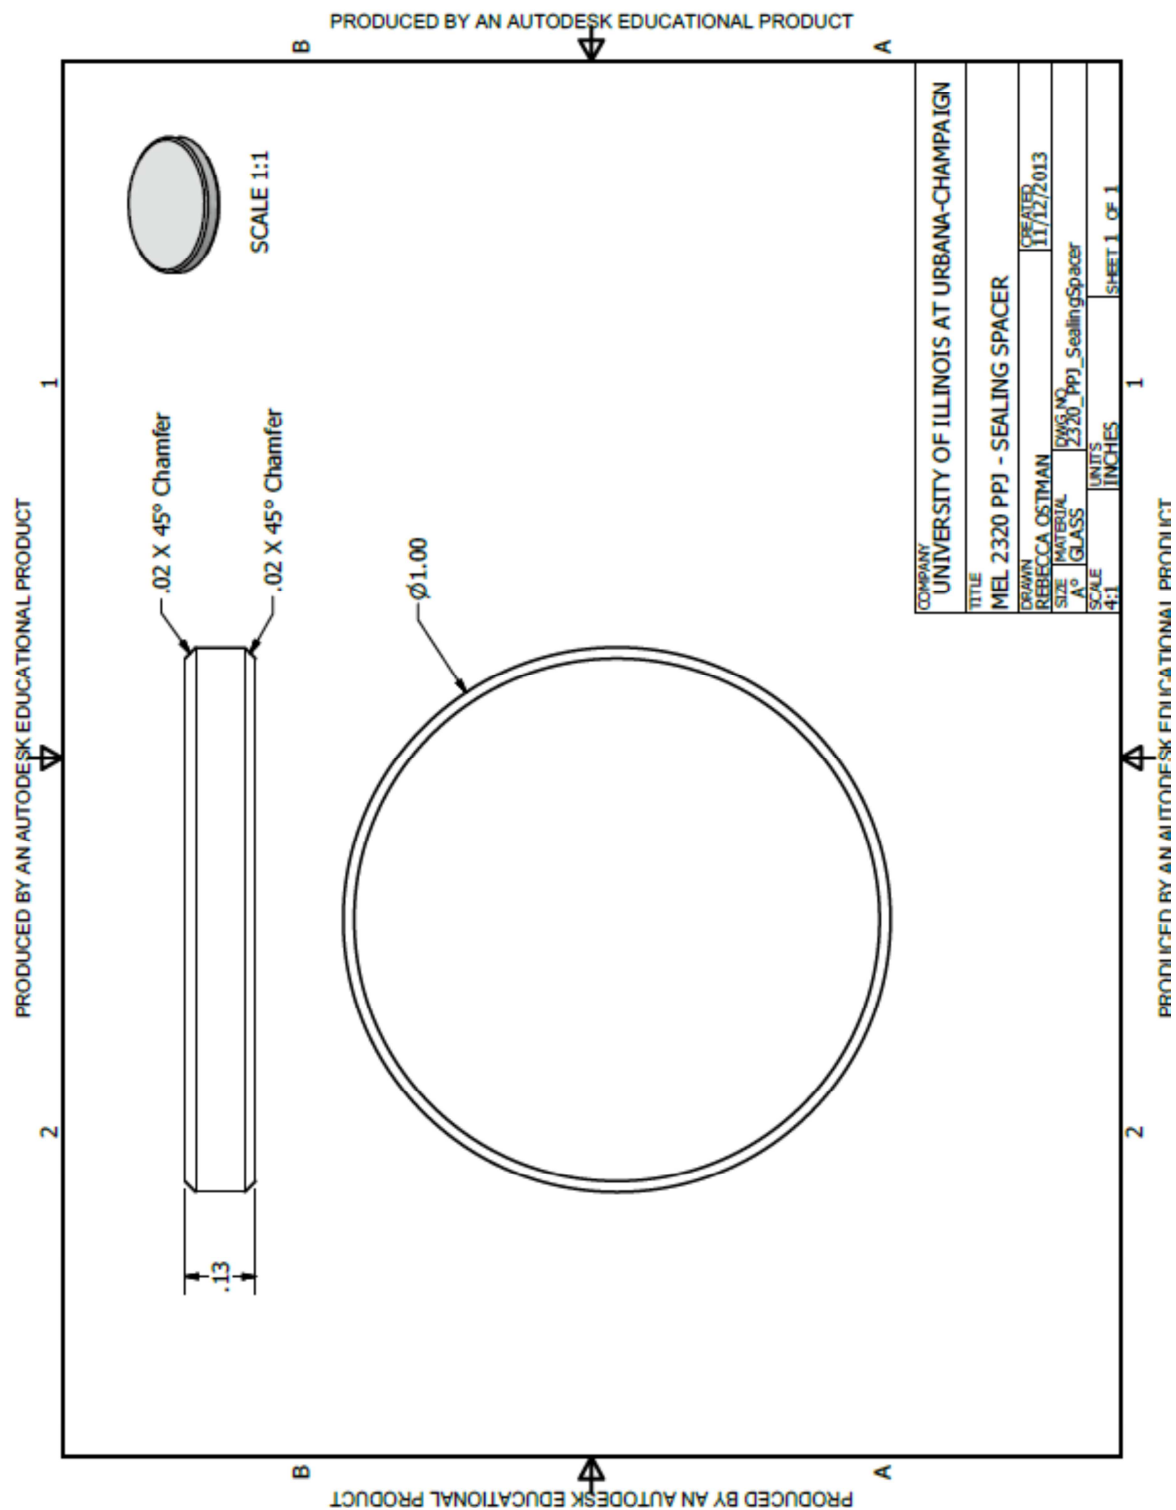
Drawing and specifications for the spacer between the cavity housing and its tie-down piece, also used to seal the cavity.
